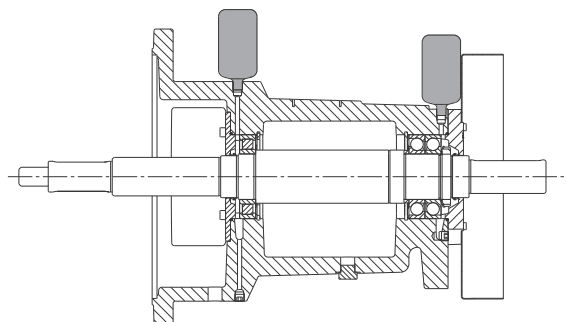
Bearing bracket with open roller bearing and double angular contact bearing lubricated via automatic grease lubricators
